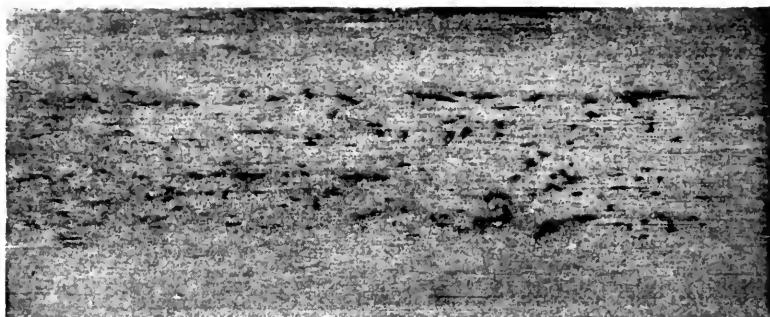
ETCHED HORIZONTAL SECTION AT END OF RAIL 9010-2.
